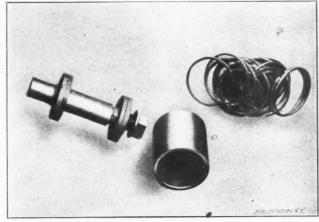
Mandrel for Holding Rings when Grinding the Outside
